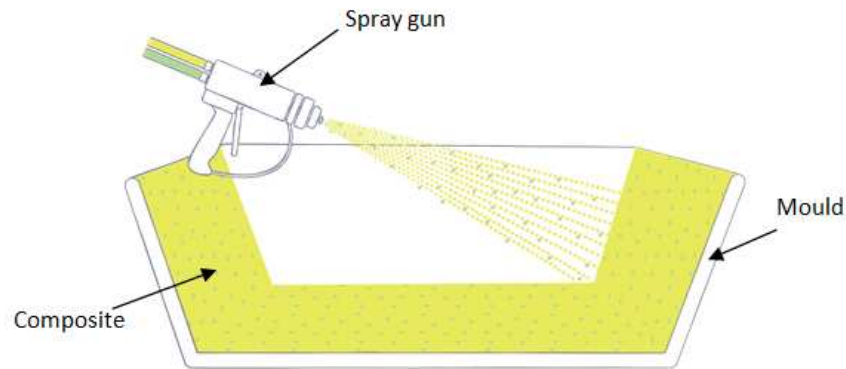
Sketch of composite manufacturing process performed by spray lay-up (adapted from [9])
